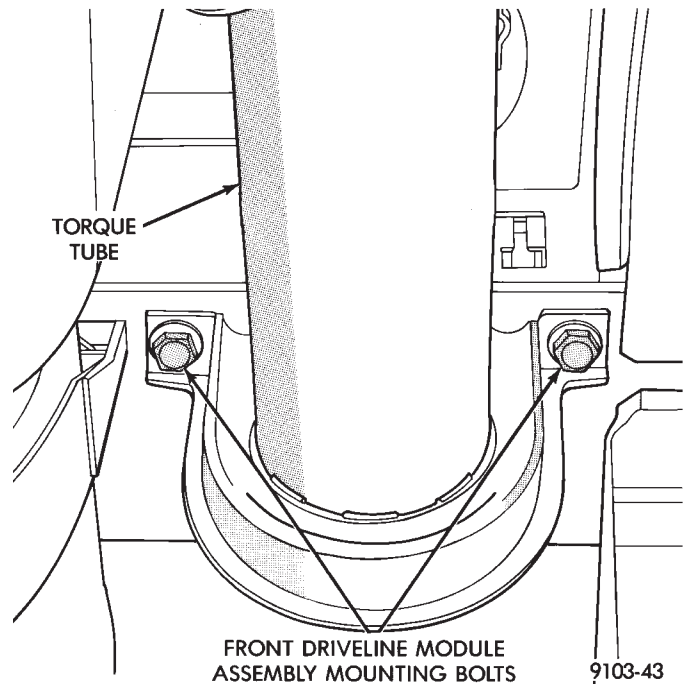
Rear Drive Line Module Front Mounting Bolts
